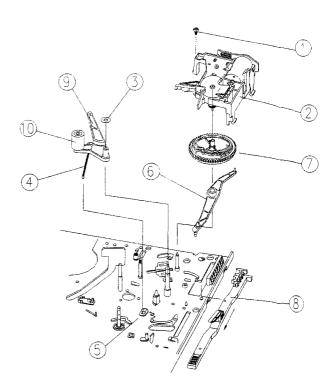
L/C BRKT, PINCH LEVER, CAM GEAR, RELAY LEVER, F/L RACK REMOVAL
